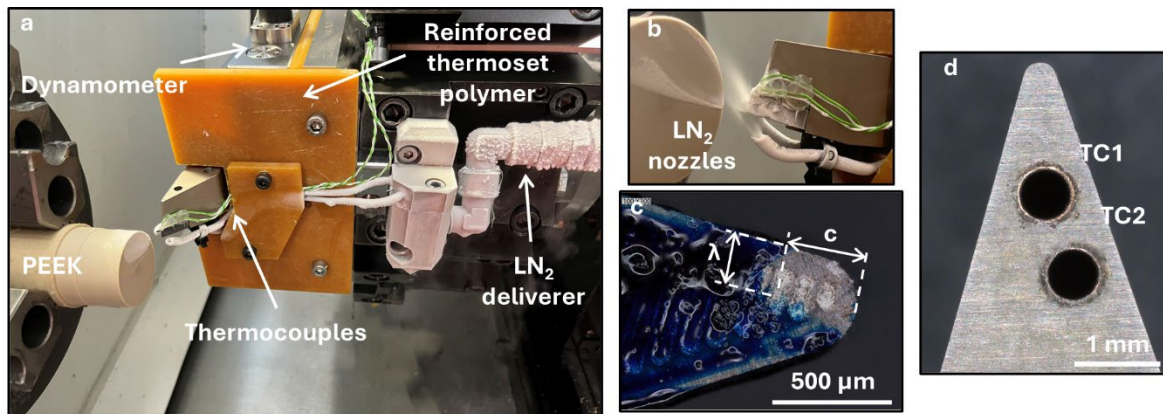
(a) Set-up for the cryogenic cooling turning trials. (b) Customised nozzles for cryogenic delivery. (c) Tool-chip contact length and width measurements. (d) Thermocouple housing holes in the back of the insert.
